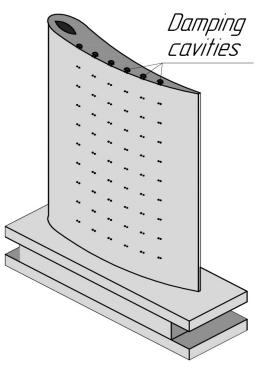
Axial compressor guide vane of a gas turbine with a damping surface on the back.
